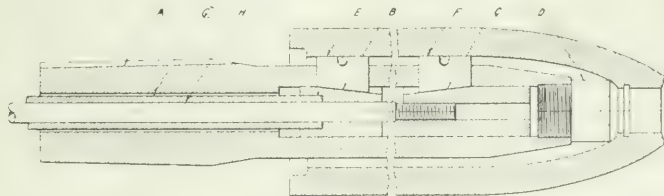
EXPANDING ARBOR WITH DOUBLE CAM ARRANGEMENT.
